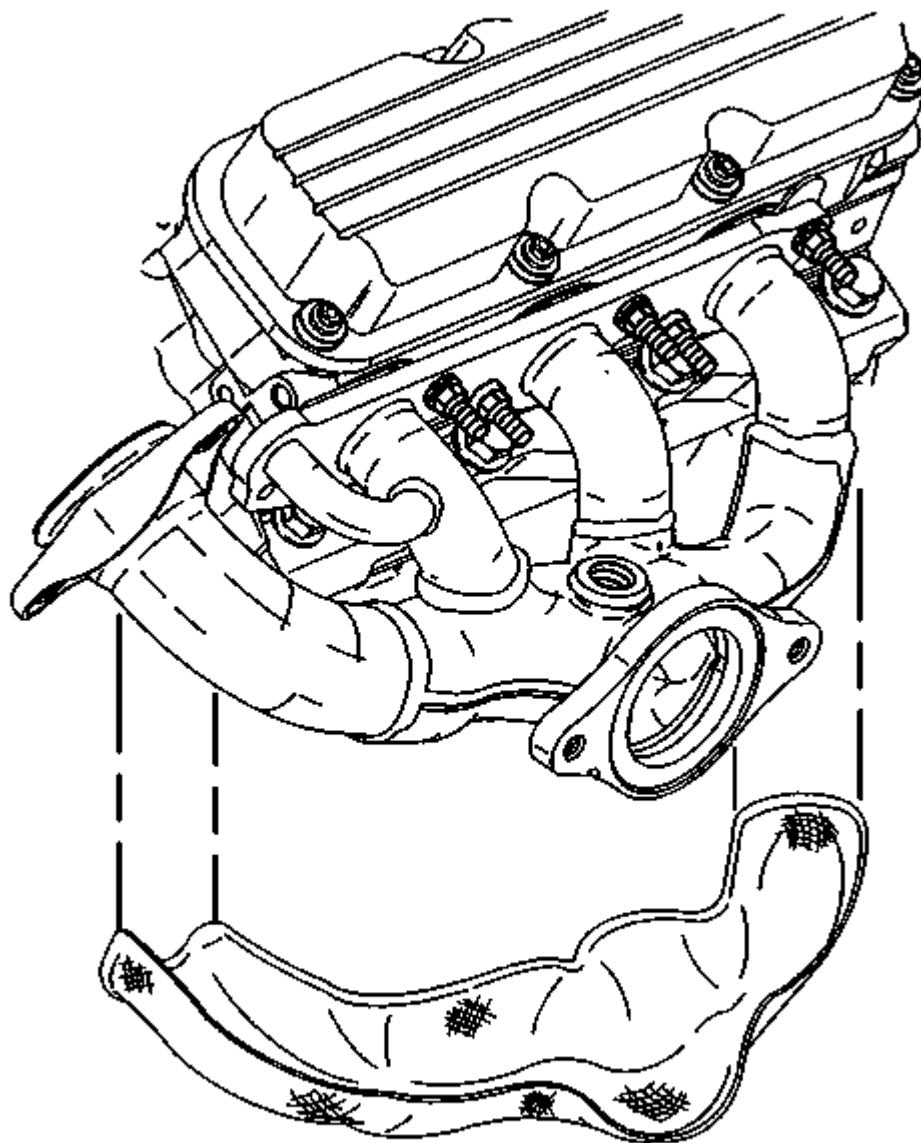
Lower Right Exhaust Manifold Heat Shield (3.8L)
